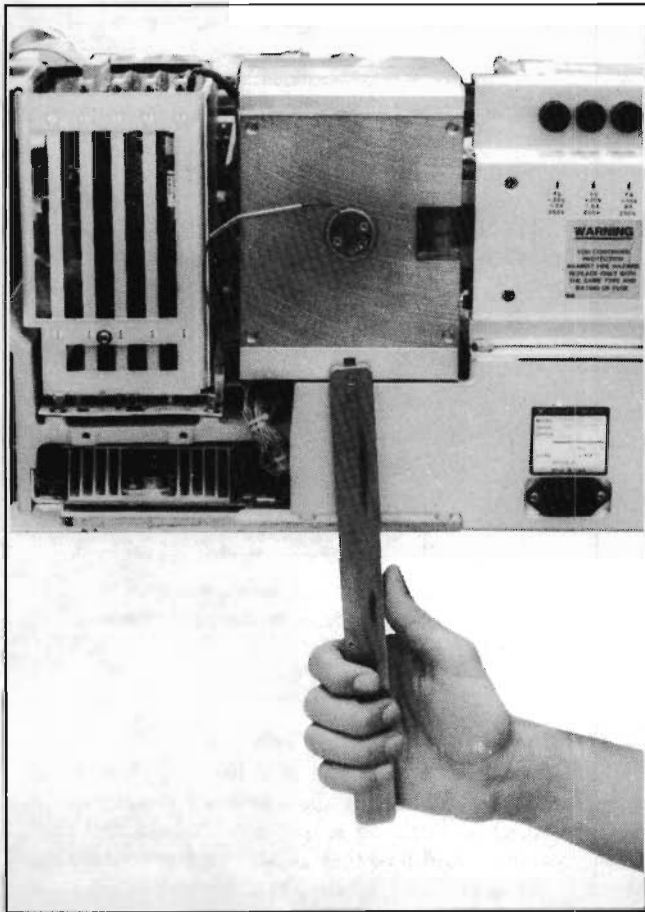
Using the Actuator Assembly Radial Alignment Tool
